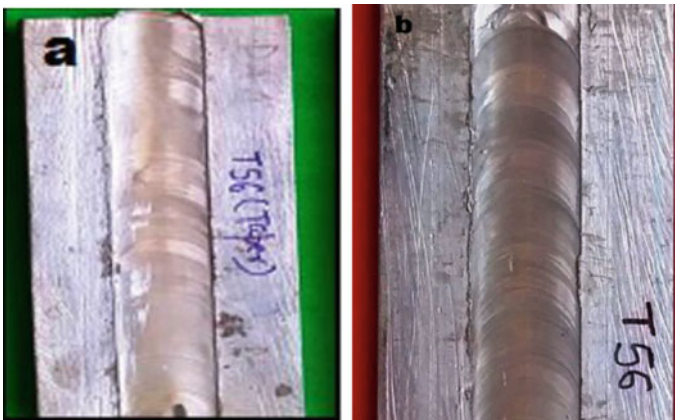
a Surface composites using, a Taper, b Threaded pin tool
